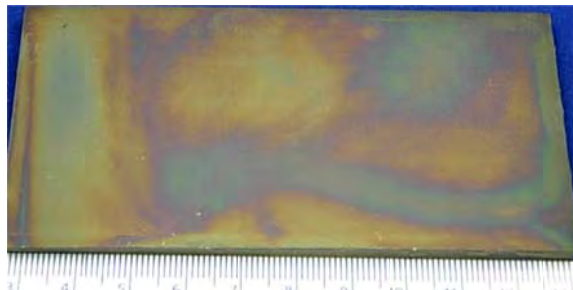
Example HSS plaque DC-plated with Cr^{3+} conversion coat for ASTM B117 corrosion testing.
